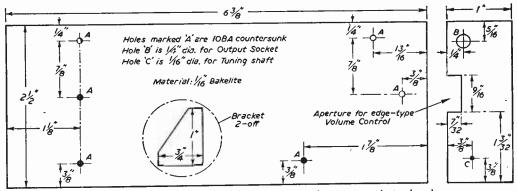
Bottom and front panels and (inset) dimensions of the brackets.
